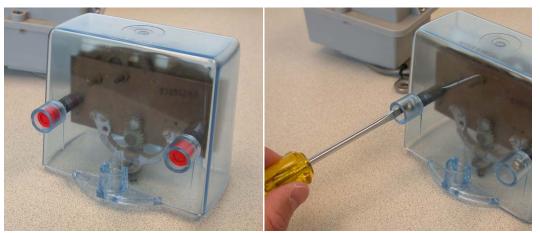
7. Remove Index Cover Tamper Seals and Screws
